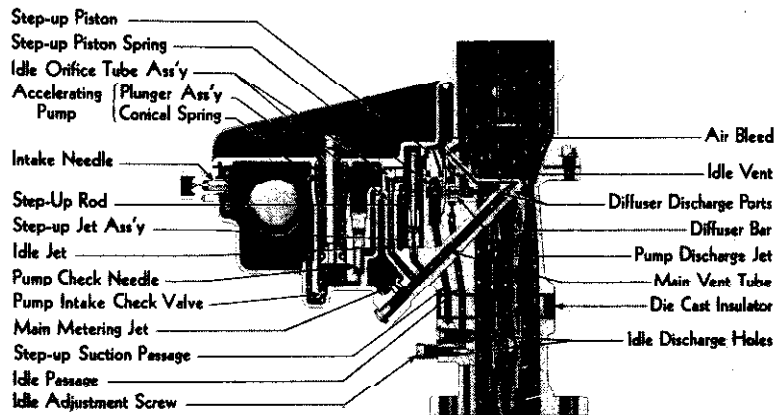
Illustration No. 21—Sectional View of Carburetor—J-30 Model
